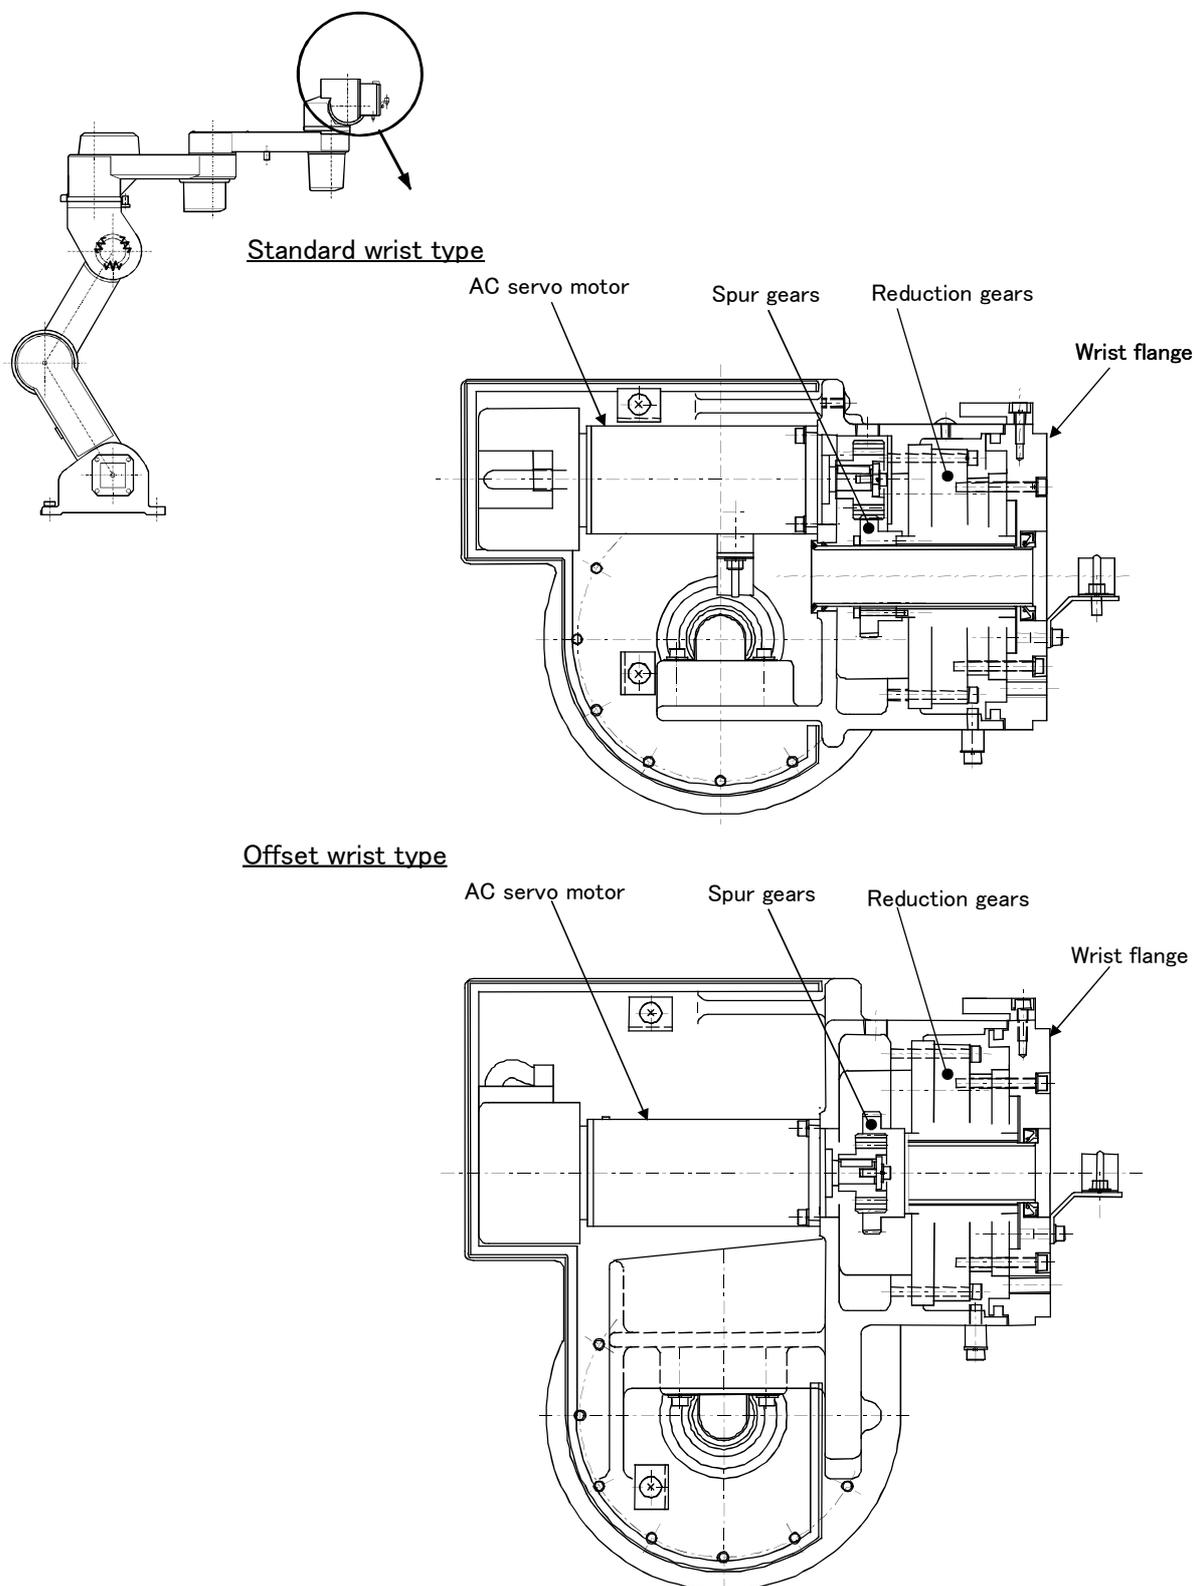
J6 axis drive mechanism (RH-1500G series)
